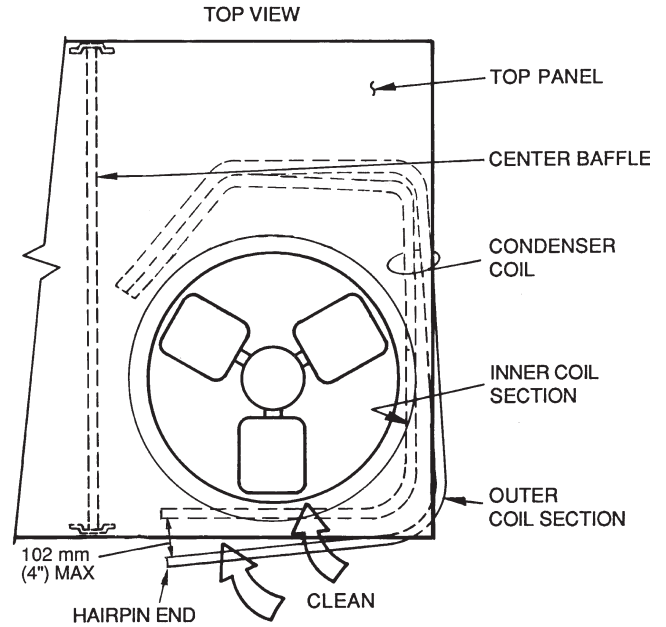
Cleaning Condenser Coil (Size 04-06 shown)
